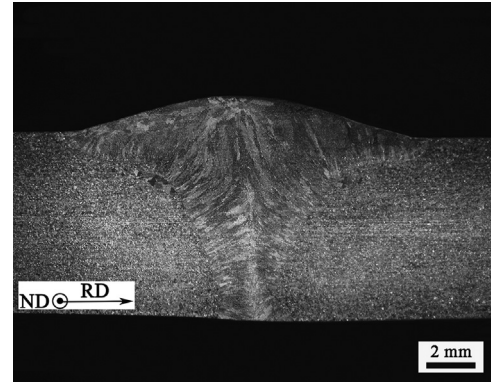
Optical microscope image of a cross-section of the K-TIG welded joint.
